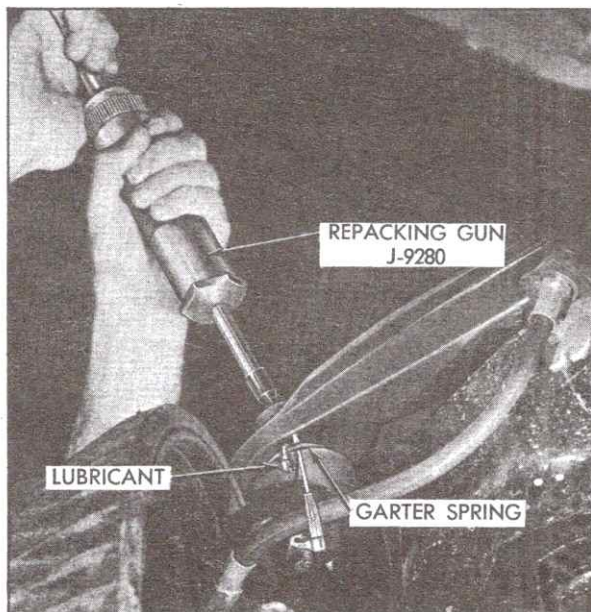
Repacking Front Upper Spherical Joint Seal
